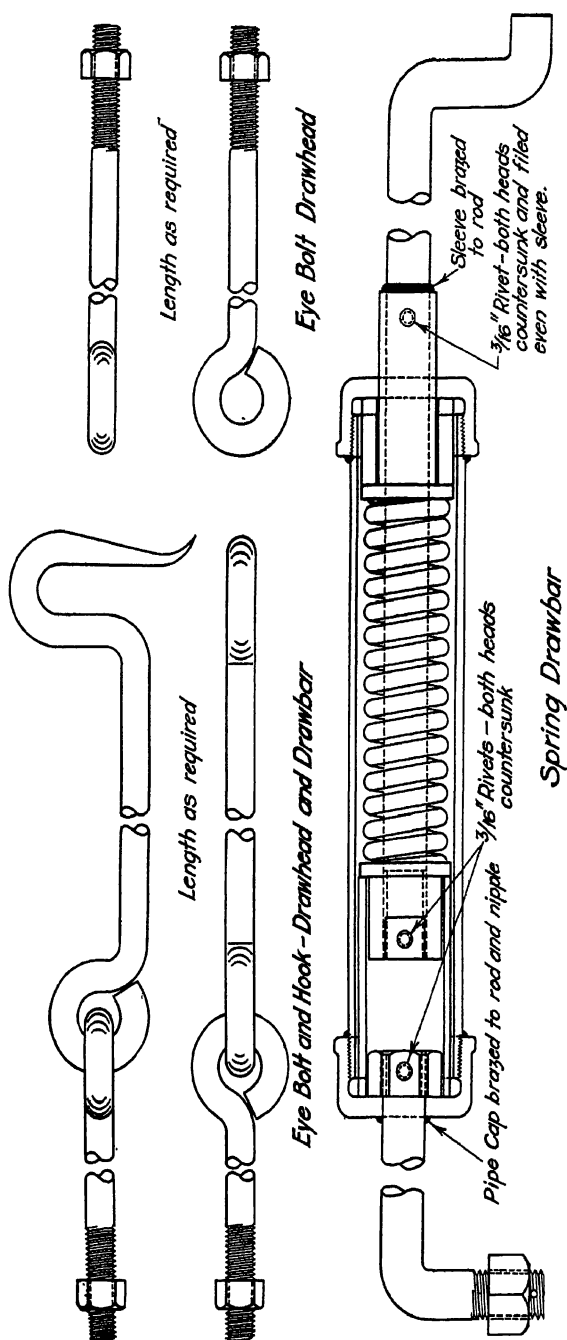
TYPICAL DESIGN FOR COUPLER DRAWBAR.
